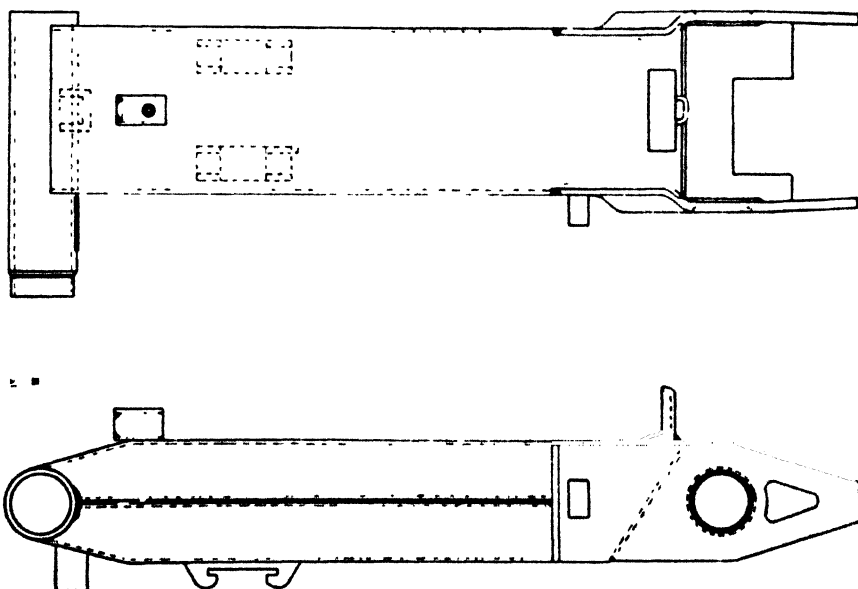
Line drawings showing the welded design employed on the outriggers which attach to the main body of the chassis.
